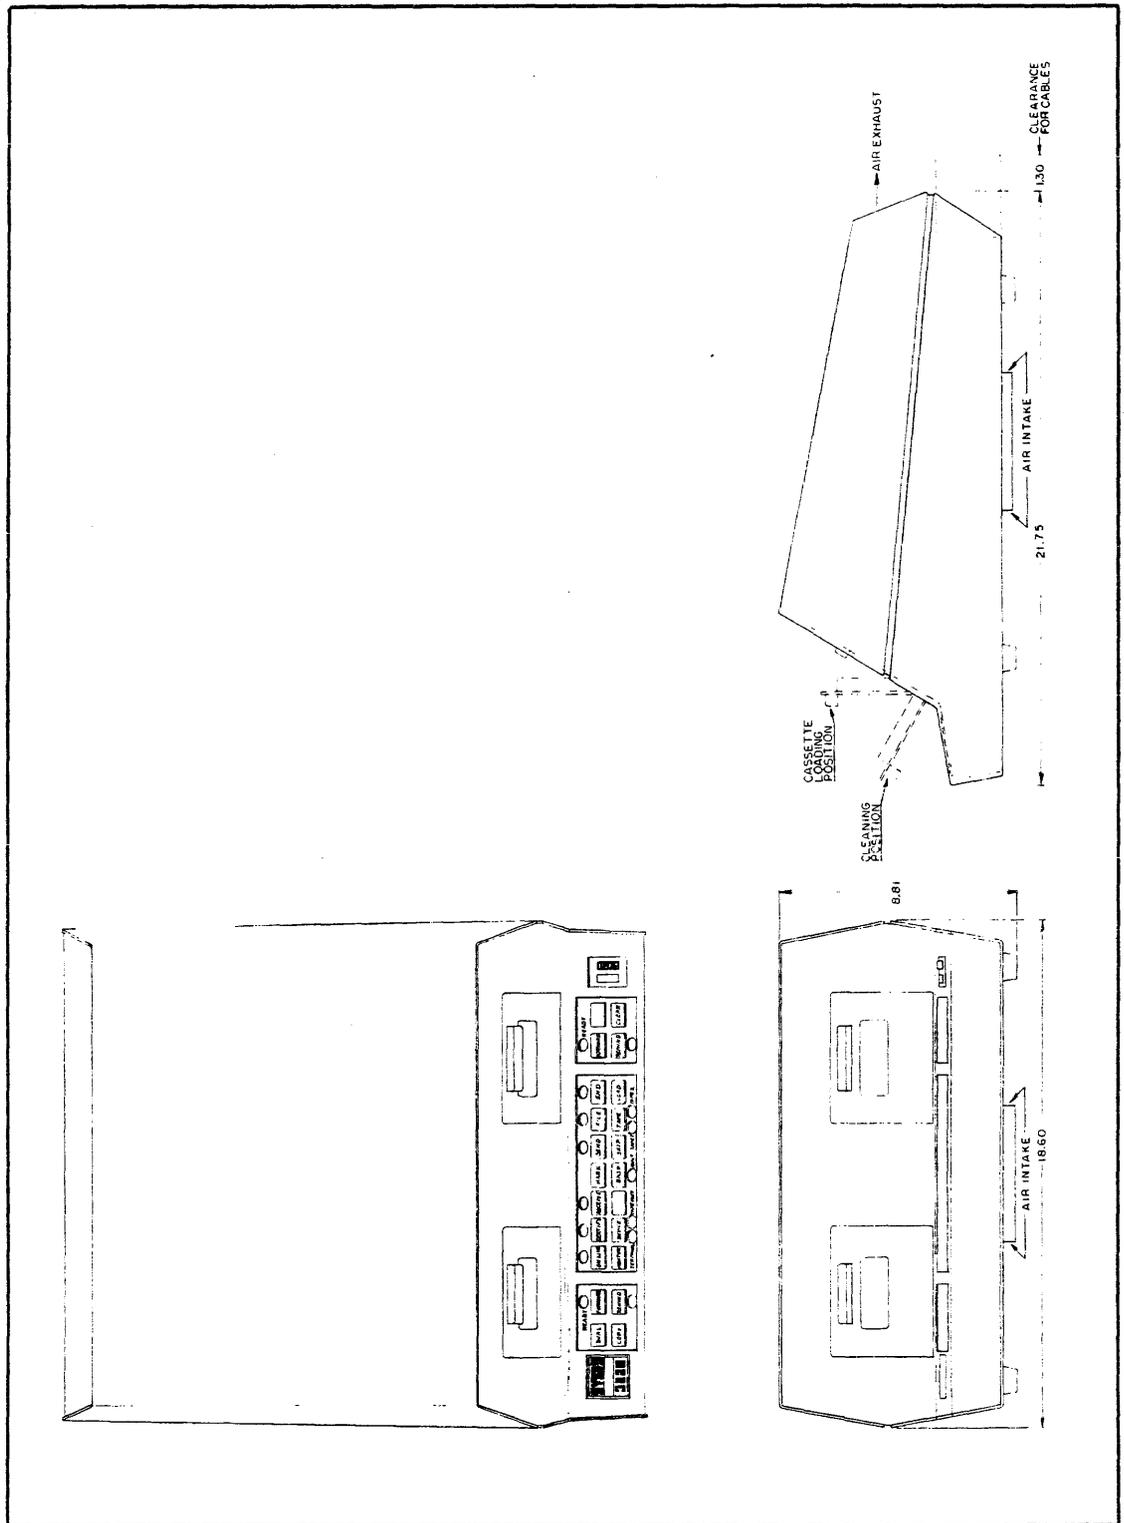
DIMENSIONS - DESK TOP UNITS
